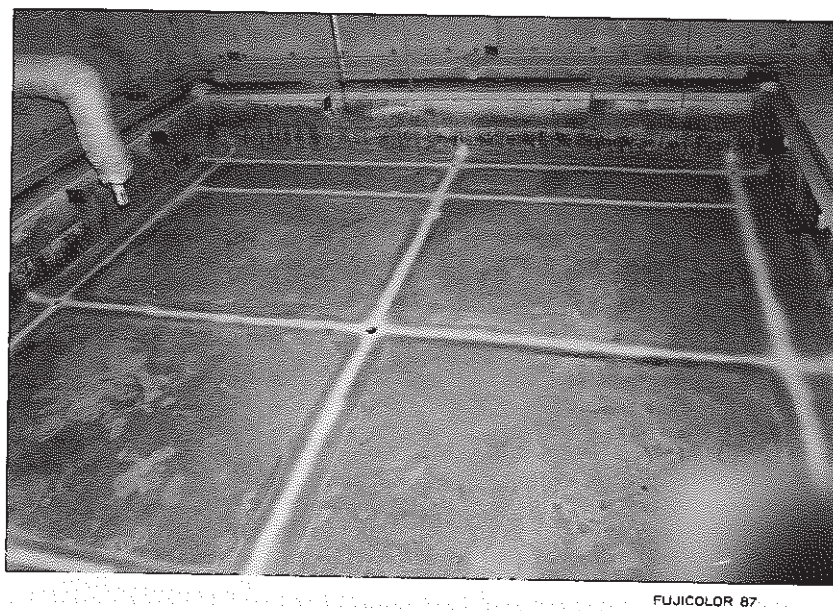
2 : Non-desructive Inspection of Weld Line
